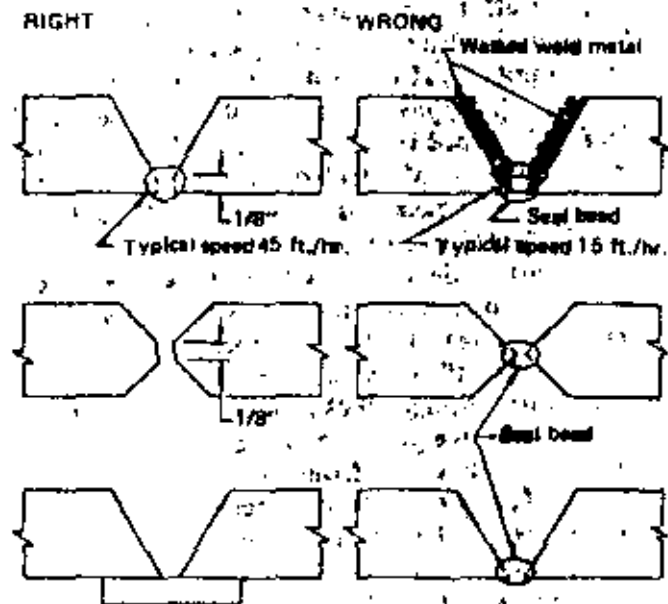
Proper joint geometry for thick-plate welding.
